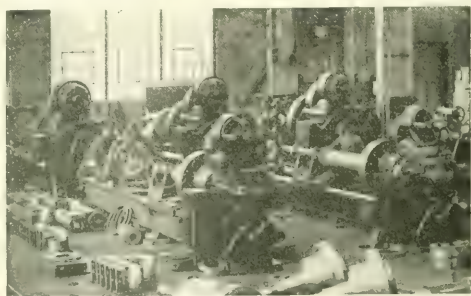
METHOD OF SAFEGUARDING LATHE GEARS
